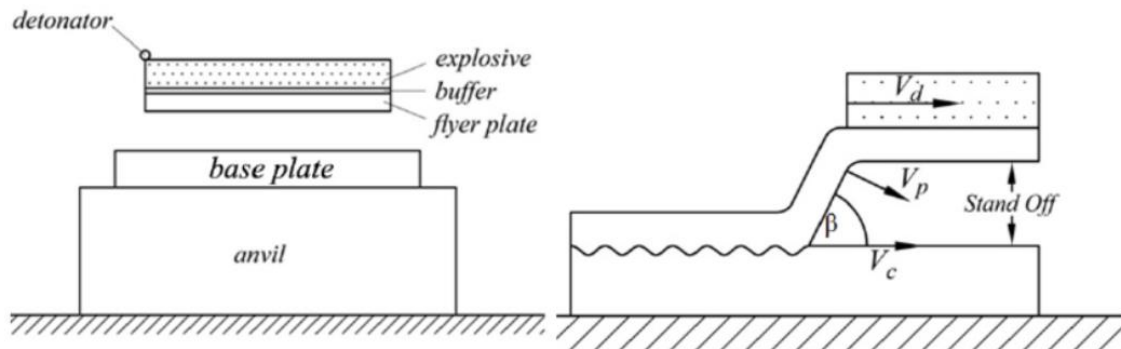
Schematic illustration of Explosive Welding.
